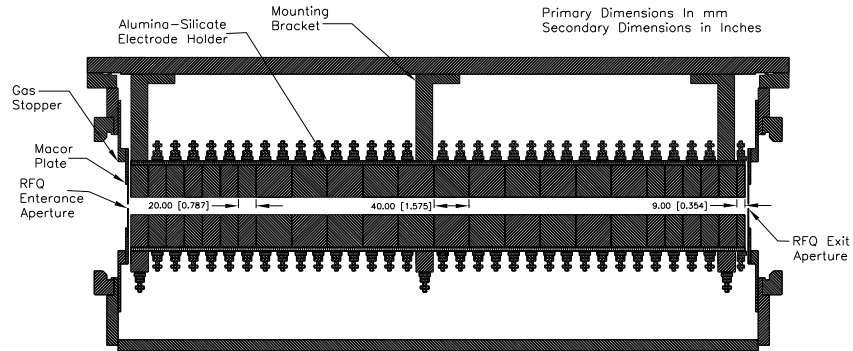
Mechanical drawing of the RFQ design (side view).
